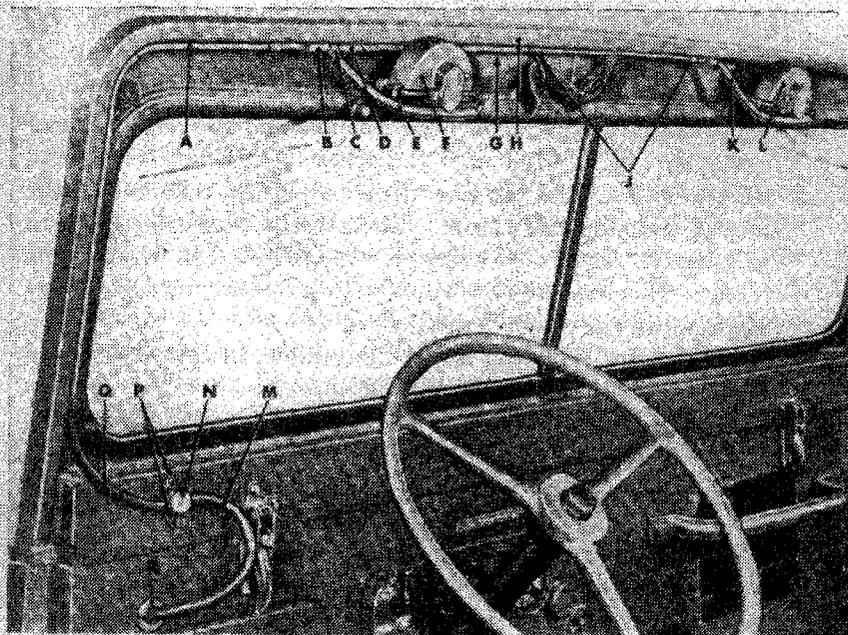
Windshield wiper blade and adjustable arm assemblies—installed.
